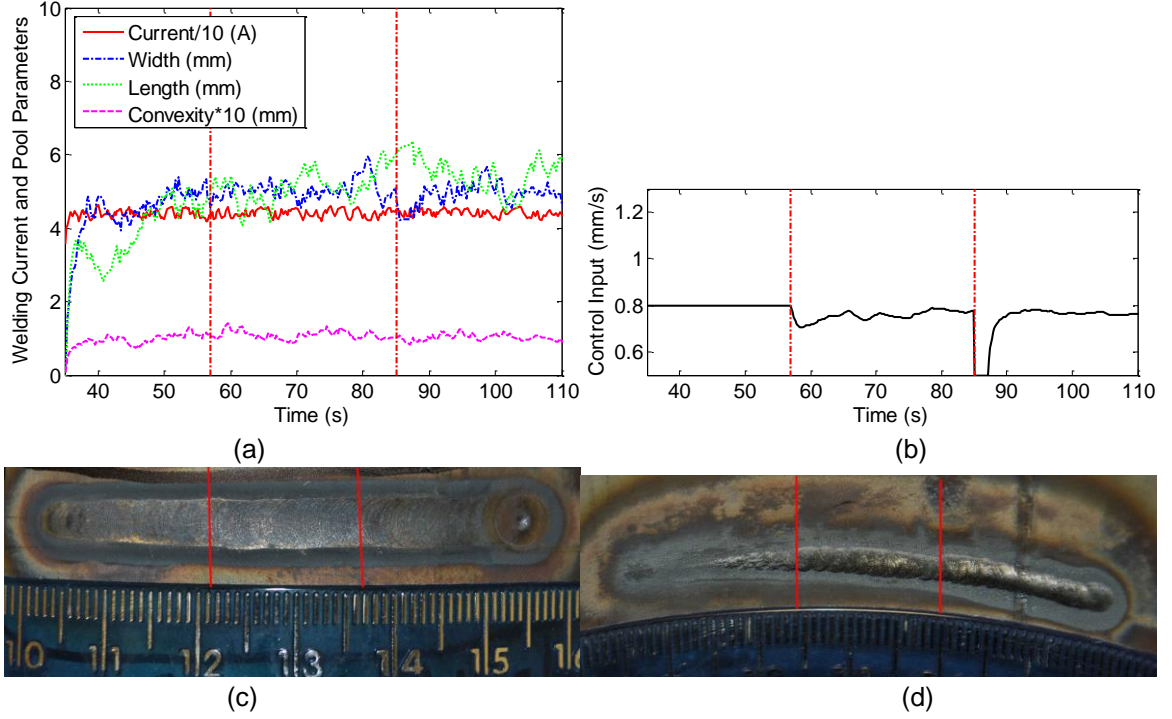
Experiment 3 results (a) Welding current and weld pool parameters (b) Control input (c) Front-side bead (d) Back-side bead.
